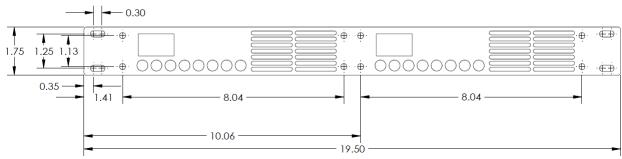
Dimensioned side-by-side rack mount faceplate drawing.
